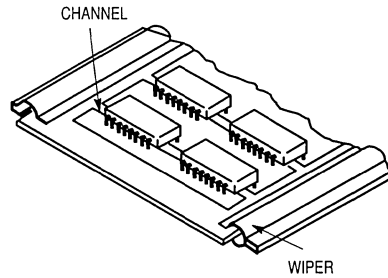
Channel/Wiper Heat Sinking on Double Layer Board
